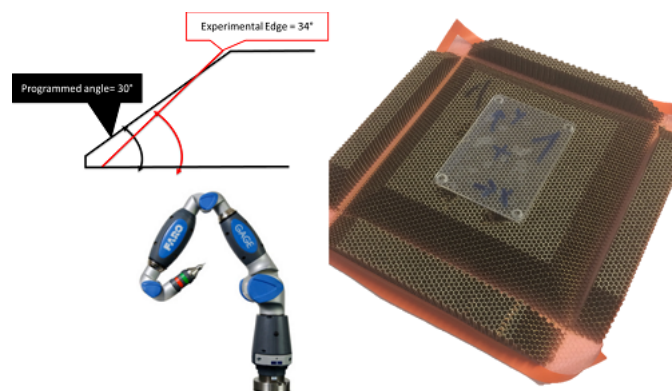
Example of a workpiece after four chamfering process on each side
